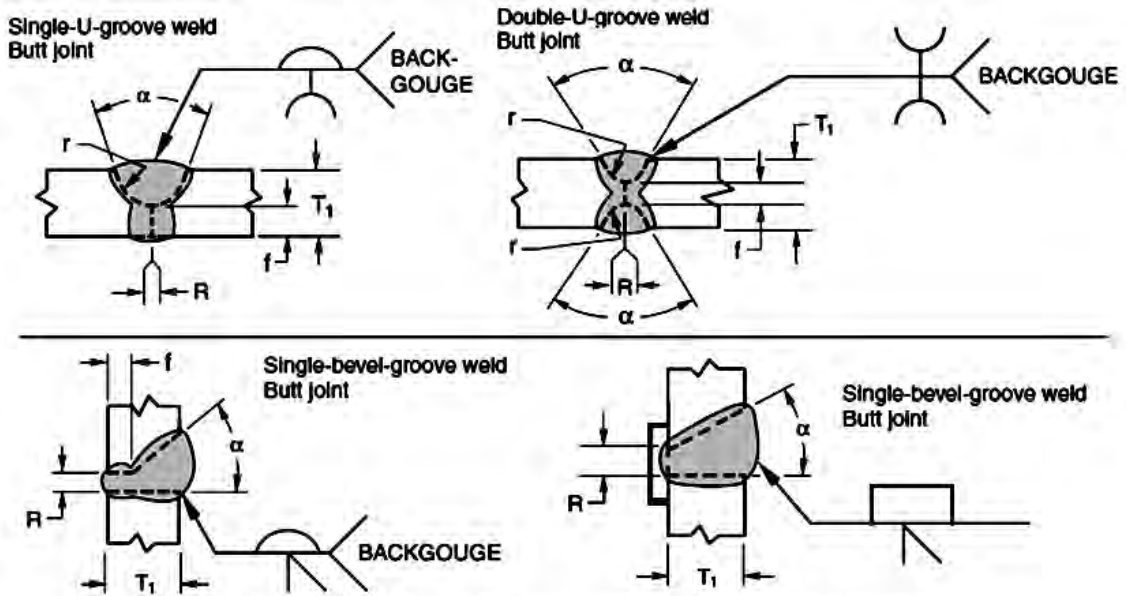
Prequalified CJP Groove Welded Joint Details
